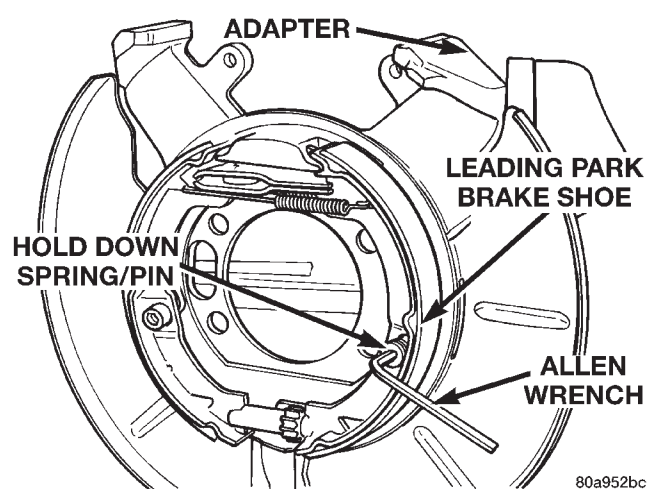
Leading Brake Shoe Hold Down Pin And Spring
